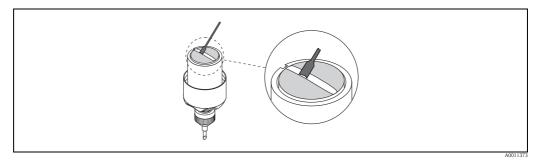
Coating the contact surfaces of the sensor with coupling fluid
